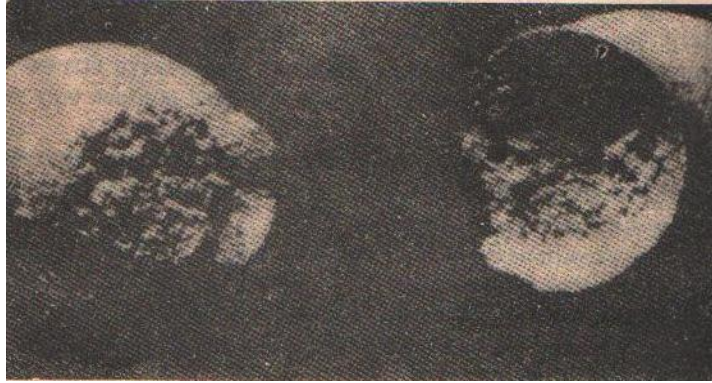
(a) Fracture of medium carbon steel (0.45% of carbon) with true stress 114,000psi
